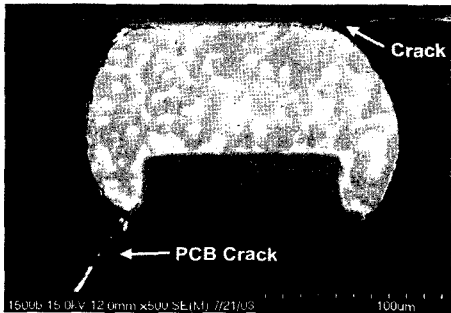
Solder crack and PCB crack after 1500 cycles
